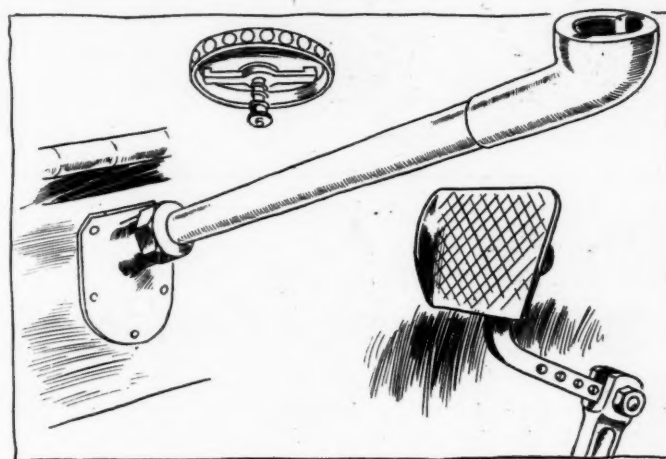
Argyll gasoline filler pipe and Sunbeam pedal
